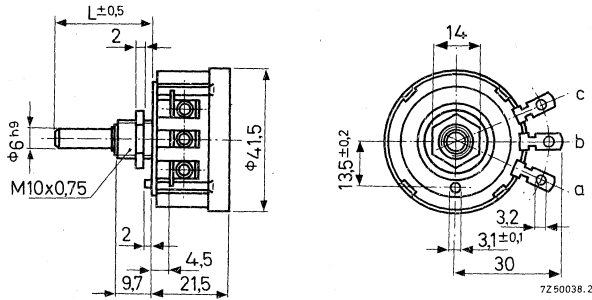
Potentiometer with plain spindle. The spindle length L is 20, 25, 30, 35 or 80 mm.
